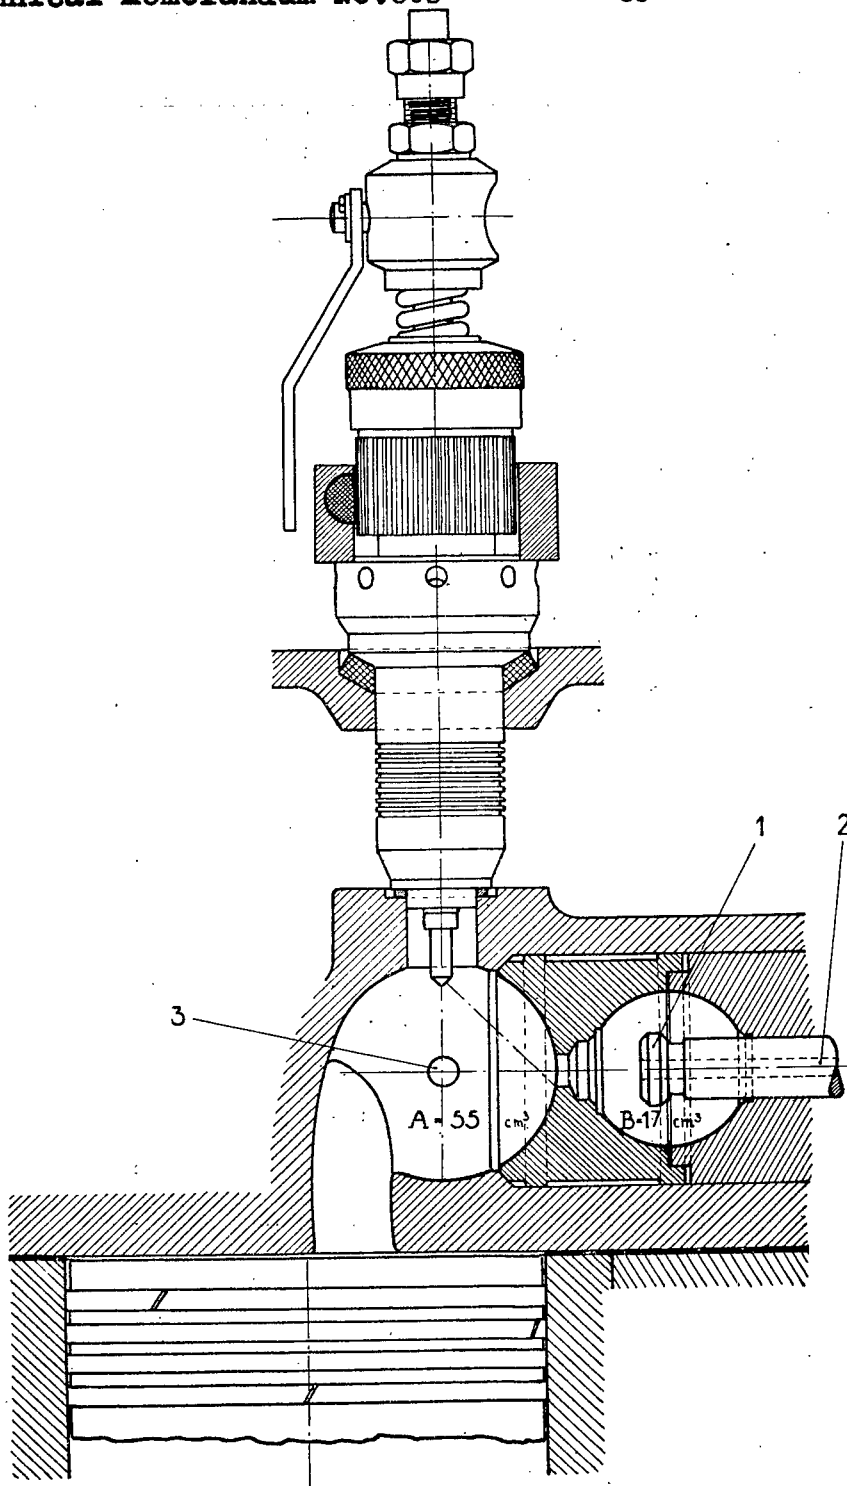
Tuscher pump-injector unit mounted on Lister engine with double turbulence chambers. A, principal B, secondary turbulence chamber, 1 closing valve of B, 2 hole for Lehmann indicator, 3 hole for Zeiss indicator.
